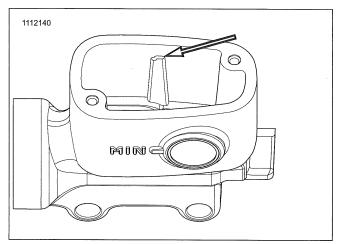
Rear Master Cylinder Fill Level DRAIN AND REPLACE FLUID
